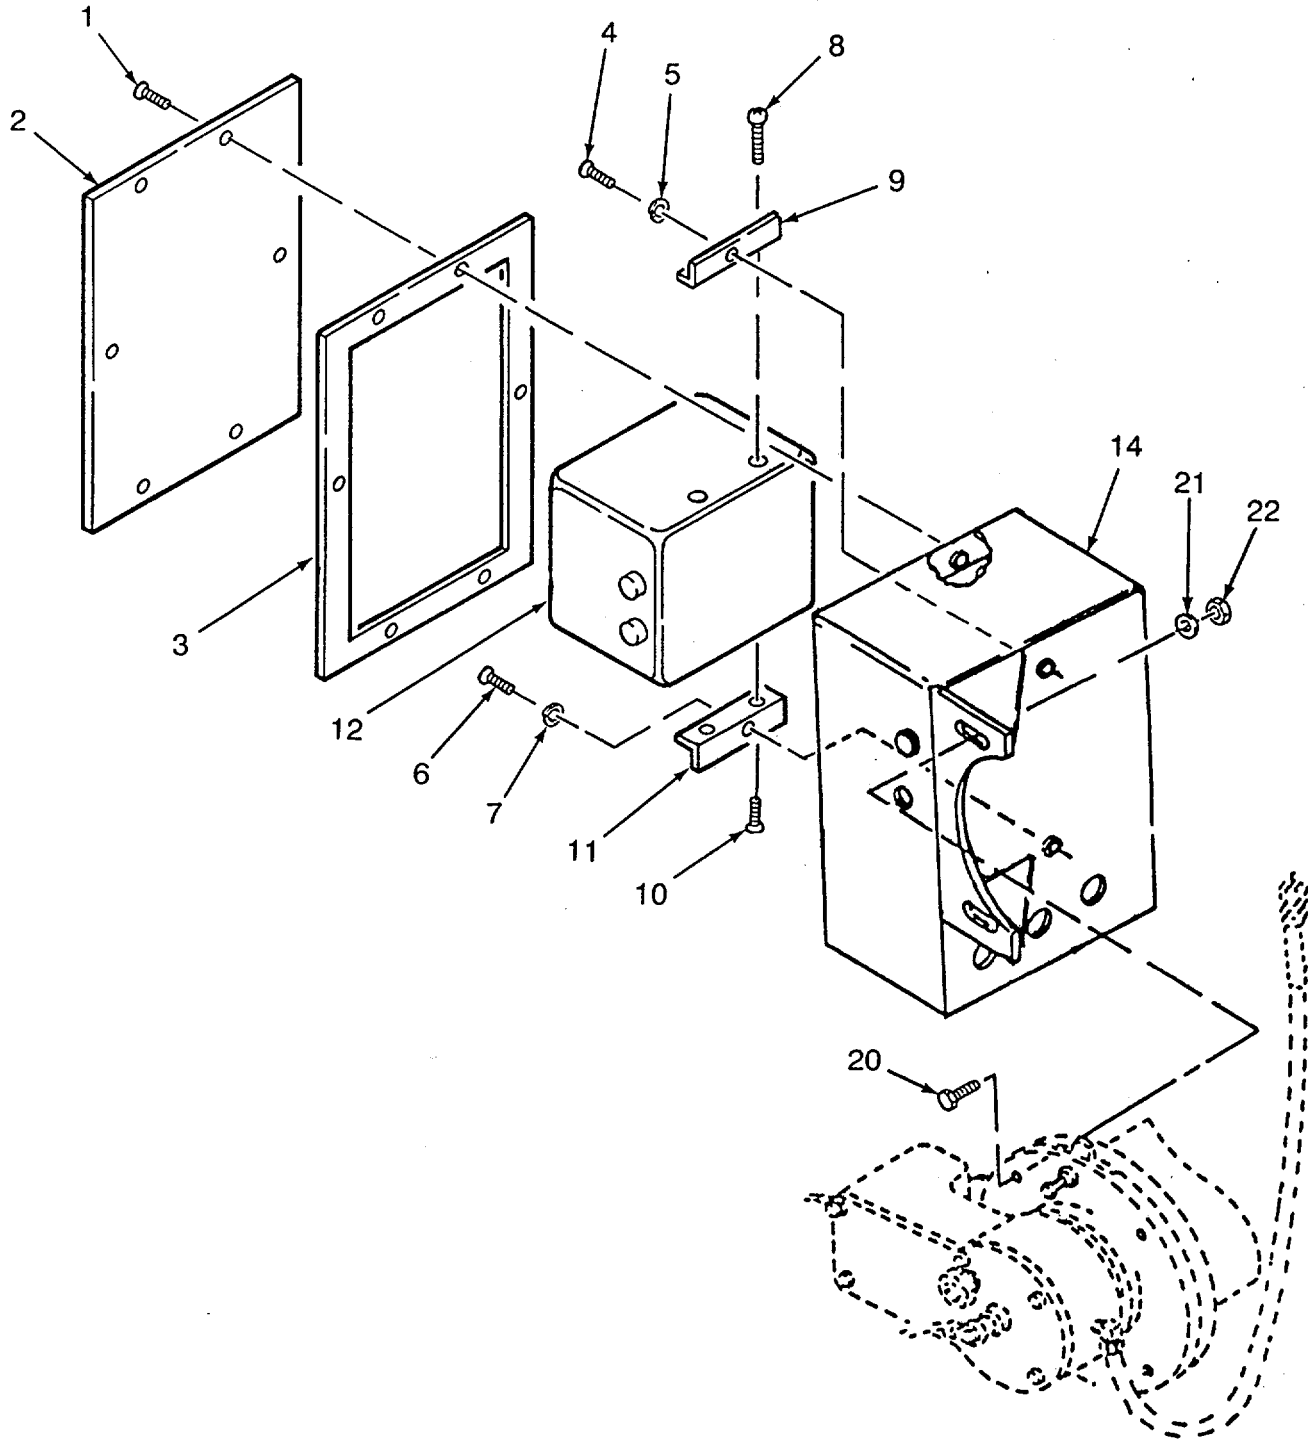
Transformer and Box (Sheet 1 of 2)
